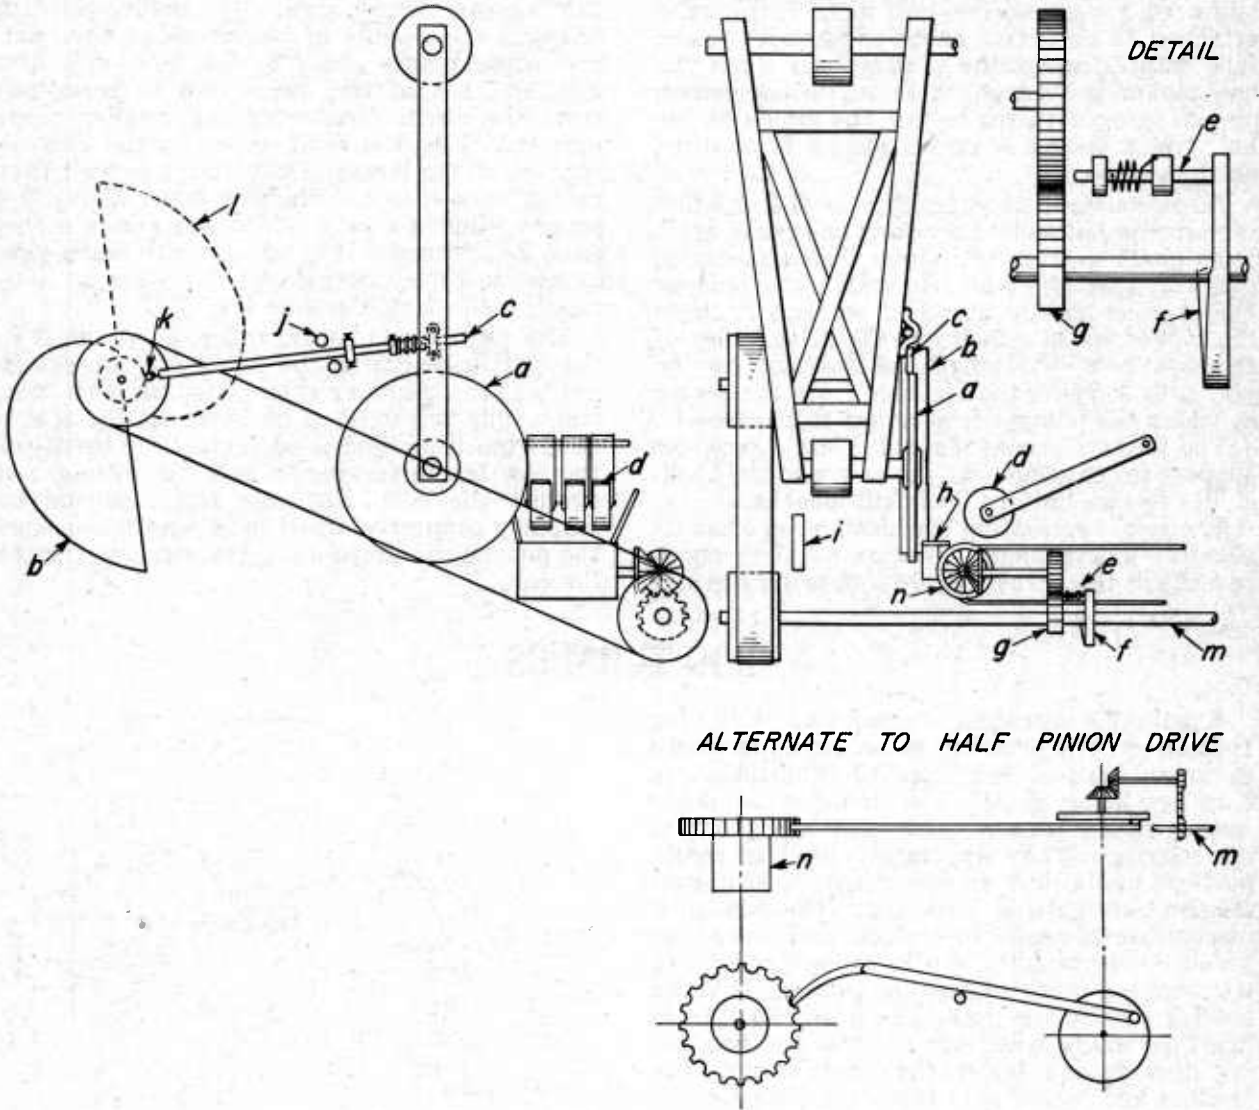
Automatic slab cut-off saw. Saw *a* is propelled as cam *b* strikes pitman rod *c*, striking slab held under idler rollers *d*. As saw completes cut, half-pinion gear *g* engages conveyor mechanism to advance slab for next cut through pulley *n*. Plunger *e*, actuated by cam *f*, is used to realine teeth of half-pinion *g* if they fail to mesh properly with conveyor gear mechanism. Plate *h* supports short slabs and backstrip *i* controls length of cut piece. Guide rolls *j* hold shaft *c* in line. End roll *k* rotates as cam *b* strikes it. Cam *l* serves as counterweight to cam *b*. Shaft *m* coordinates conveyor belt with cams by belt. The alternate drive shown functions off shaft *m* through a rod that rotates conveyor pulley *n*.
